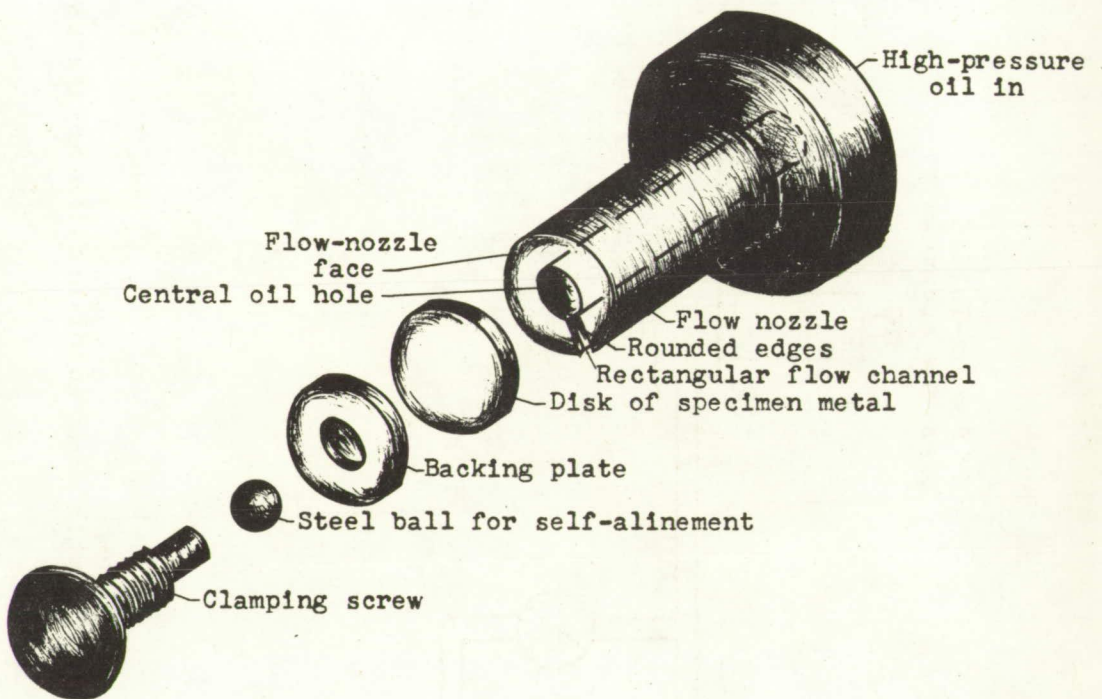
Disassembled view of flow-nozzle and specimen arrangement.
